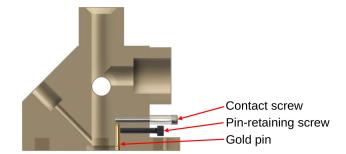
(d): The nylon set screw retains the gold pin in the compressed state.
